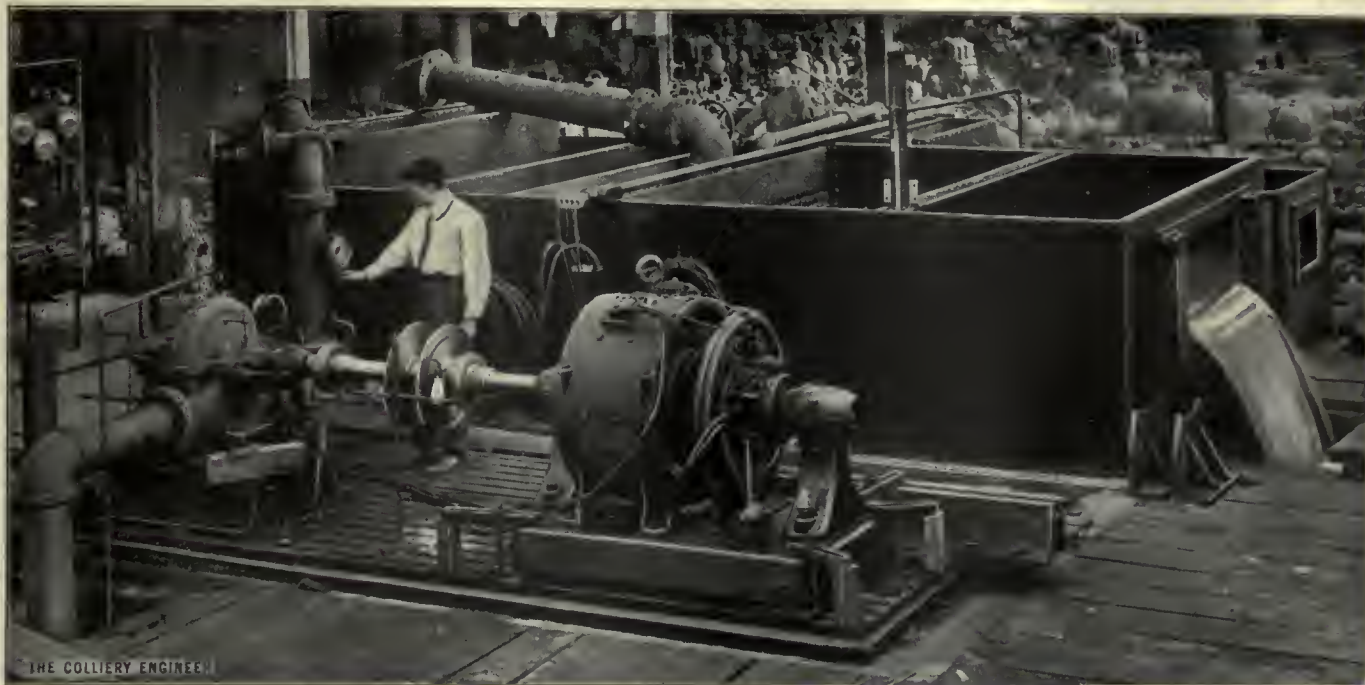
CAMERON STEAM PUMP WORKS APPARATUS FOR TESTING PUMPS
